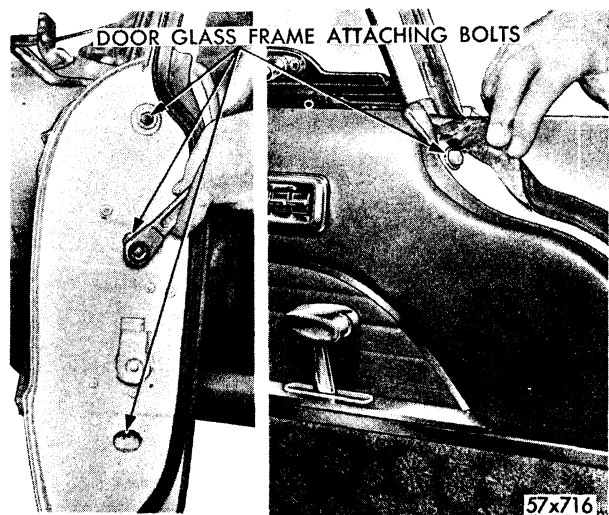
Removing and Installing Adjusting Frame and Glass Assembly
